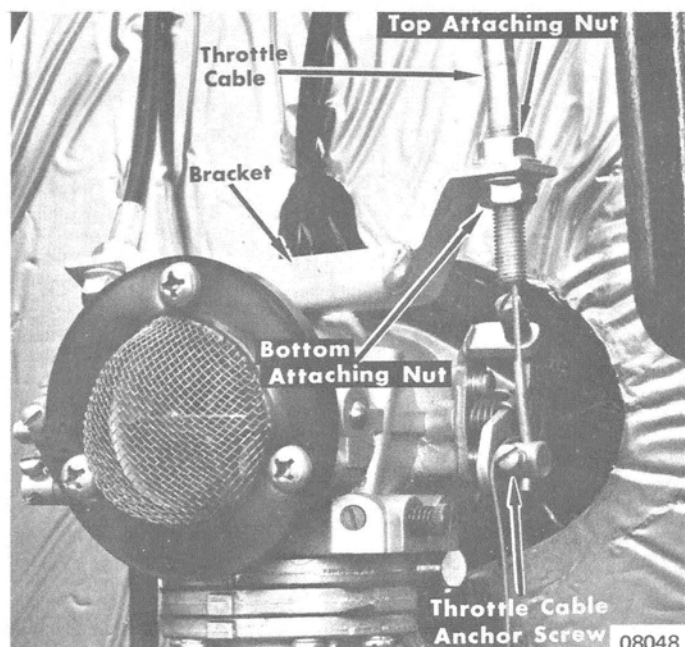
Throttle Cable to Carburetor (Chassis Serial No. 3447382 and Below)
